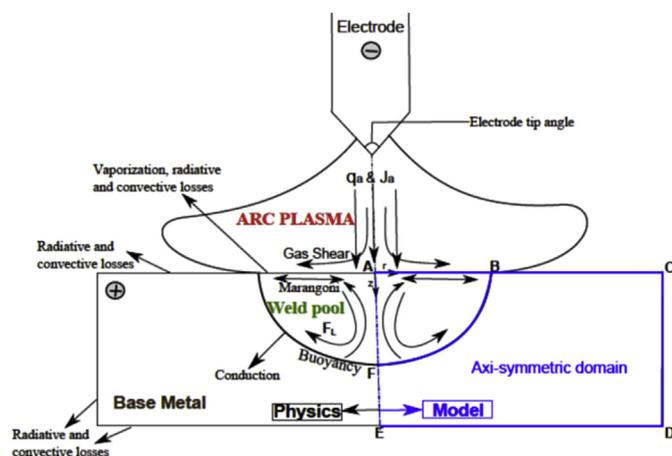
Schematic of transport phenomena occurring in the GTA Welding process.
